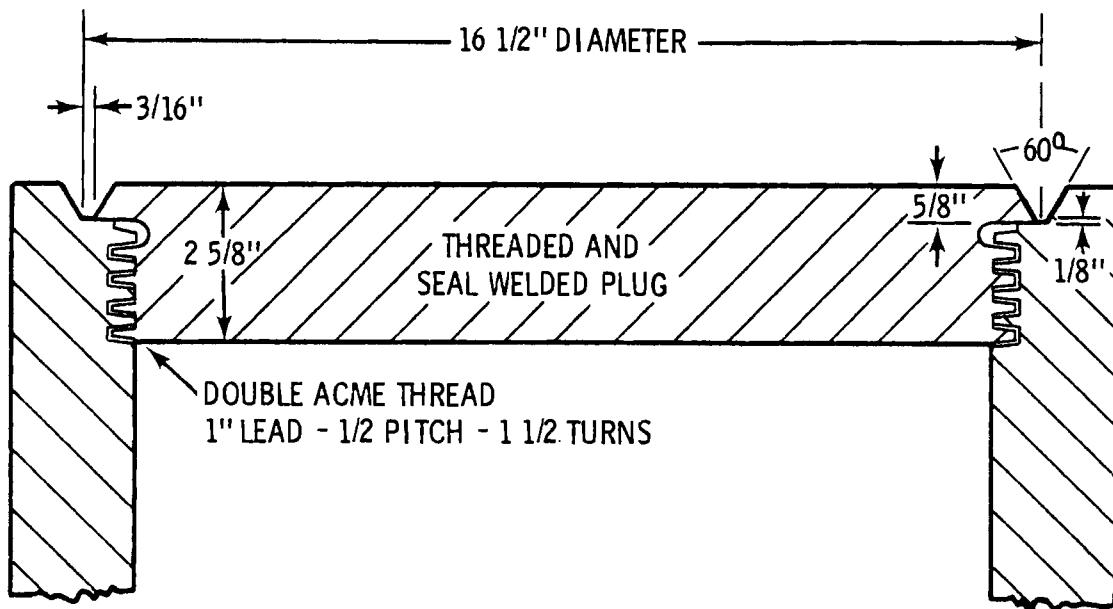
Threaded Plug with Seal Closure Weld for RSSF Cask
